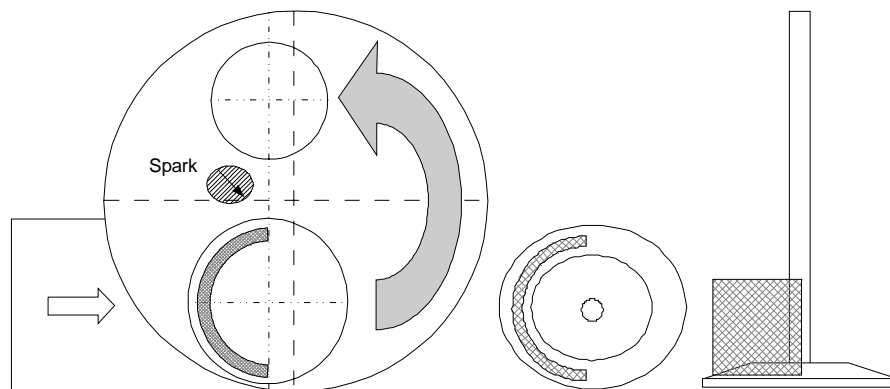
Shrouded Valve Design and Position in the Head
